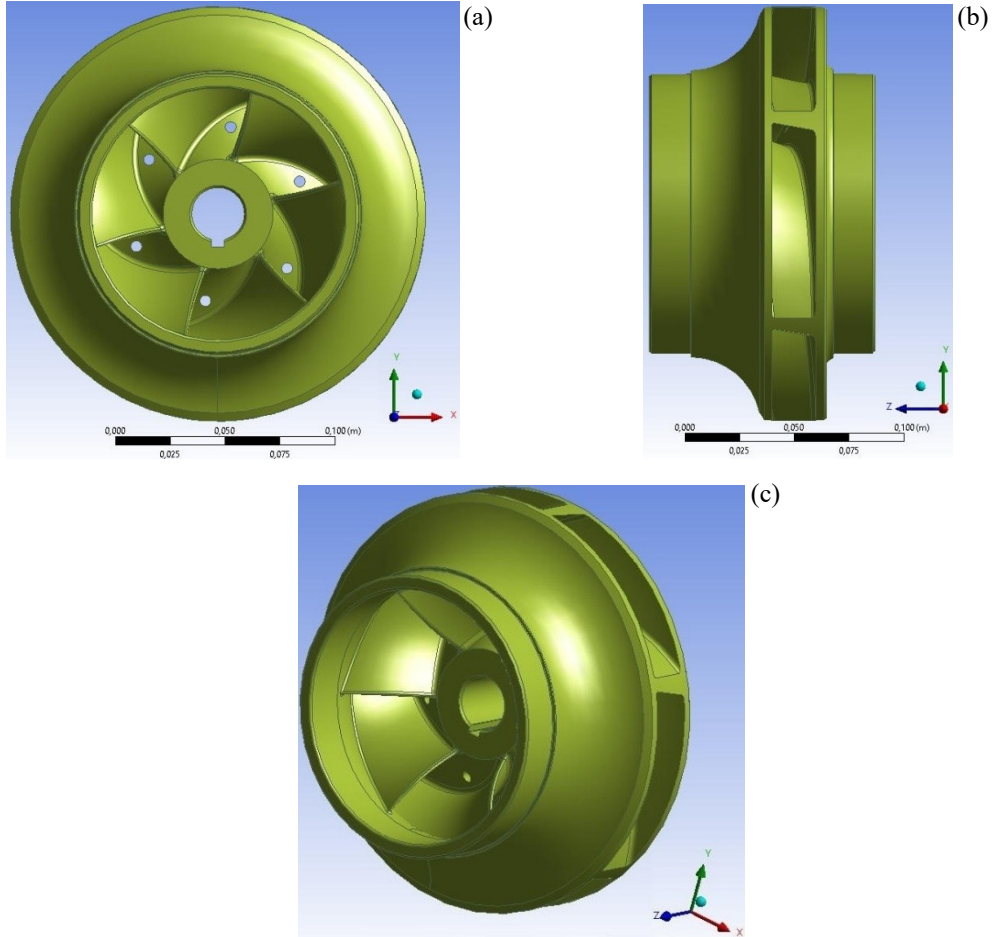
3D geometric reproduction of the HA SS PAT impeller: (a) front view, (b) side view and (c) isometric view
